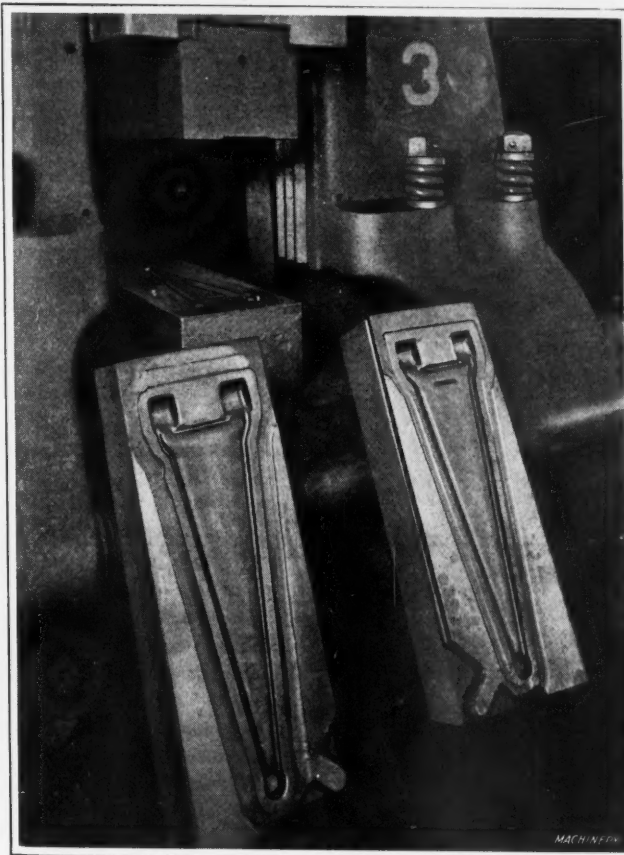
Steam Drop-hammer and Dies for producing the Torque Arm in Fig. 7
